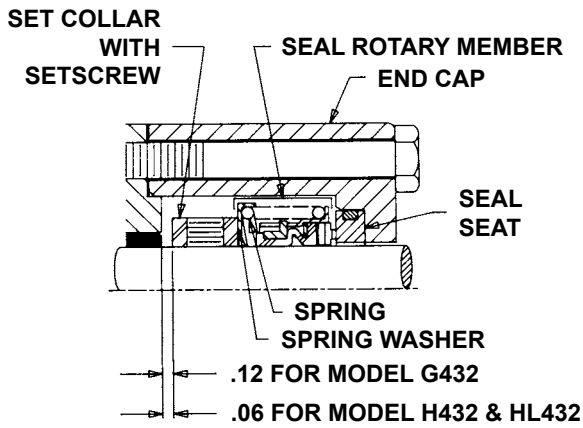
SECTIONAL VIEW, SEAL AREA
